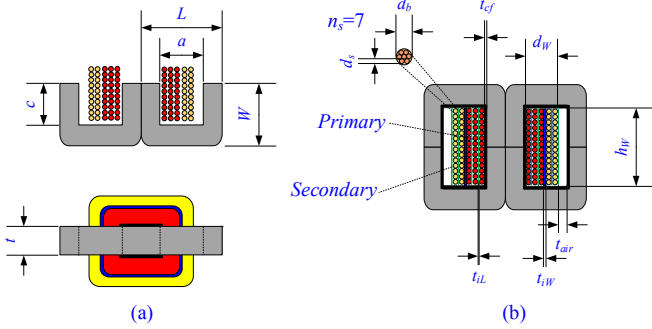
MTF constructed using N87 ferrite U-cores; (a) U-core main dimensions, and (b) concentric winding dimensions.
